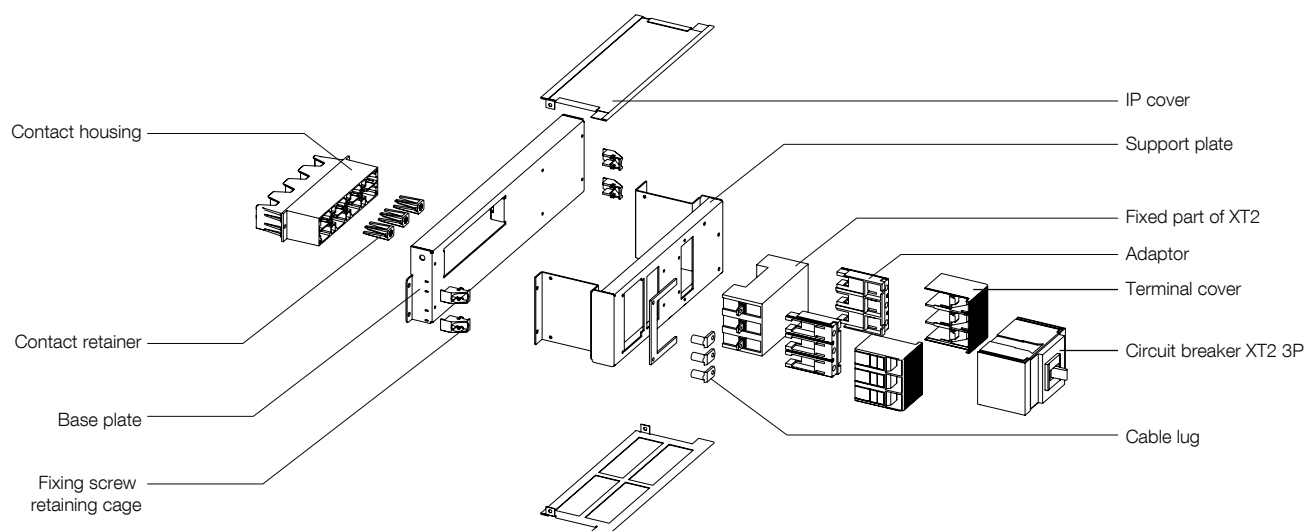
Exploded view of plug-in module cable connection to main contacts
